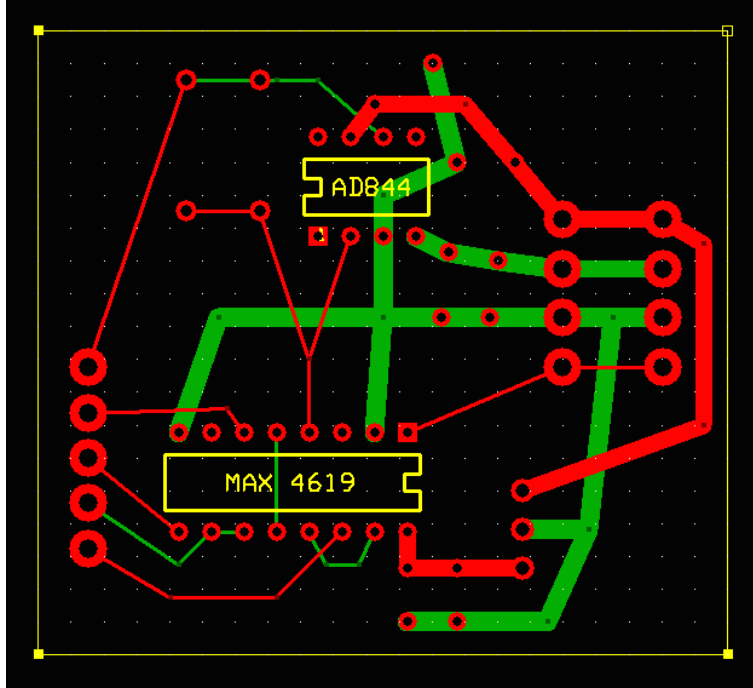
Printed circuit board drawing of three switches in single chip as in figure A.1c
